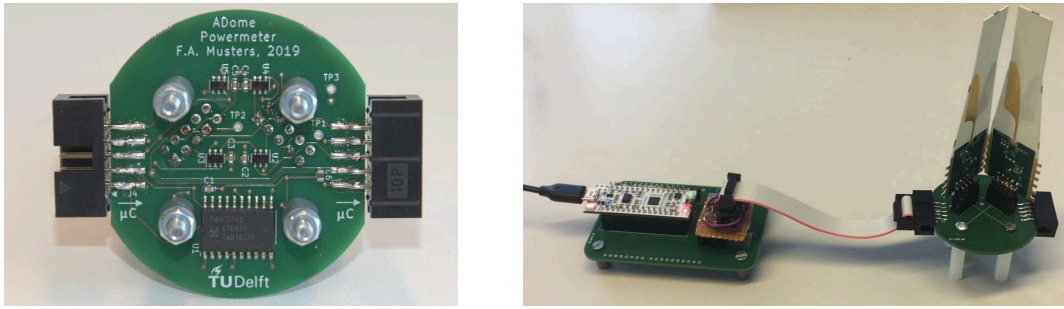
Picture of realized parentboard PCB. The parentboard diameter is 5 cm.
